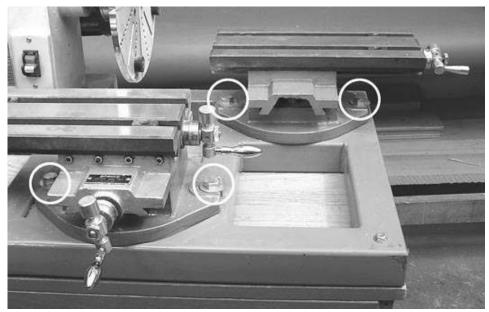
Photograph of Bolts Used to Secure Cross Slides to Base
